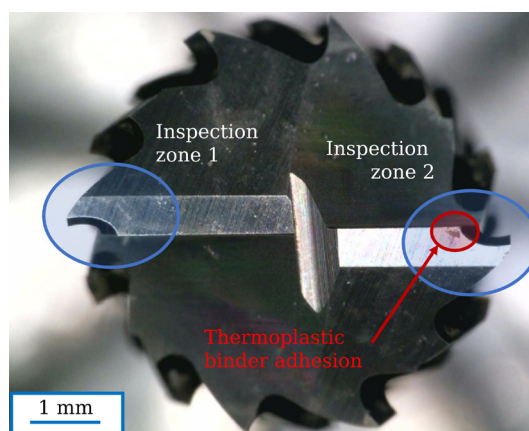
Considered inspection zones for tool wear monitoring.
